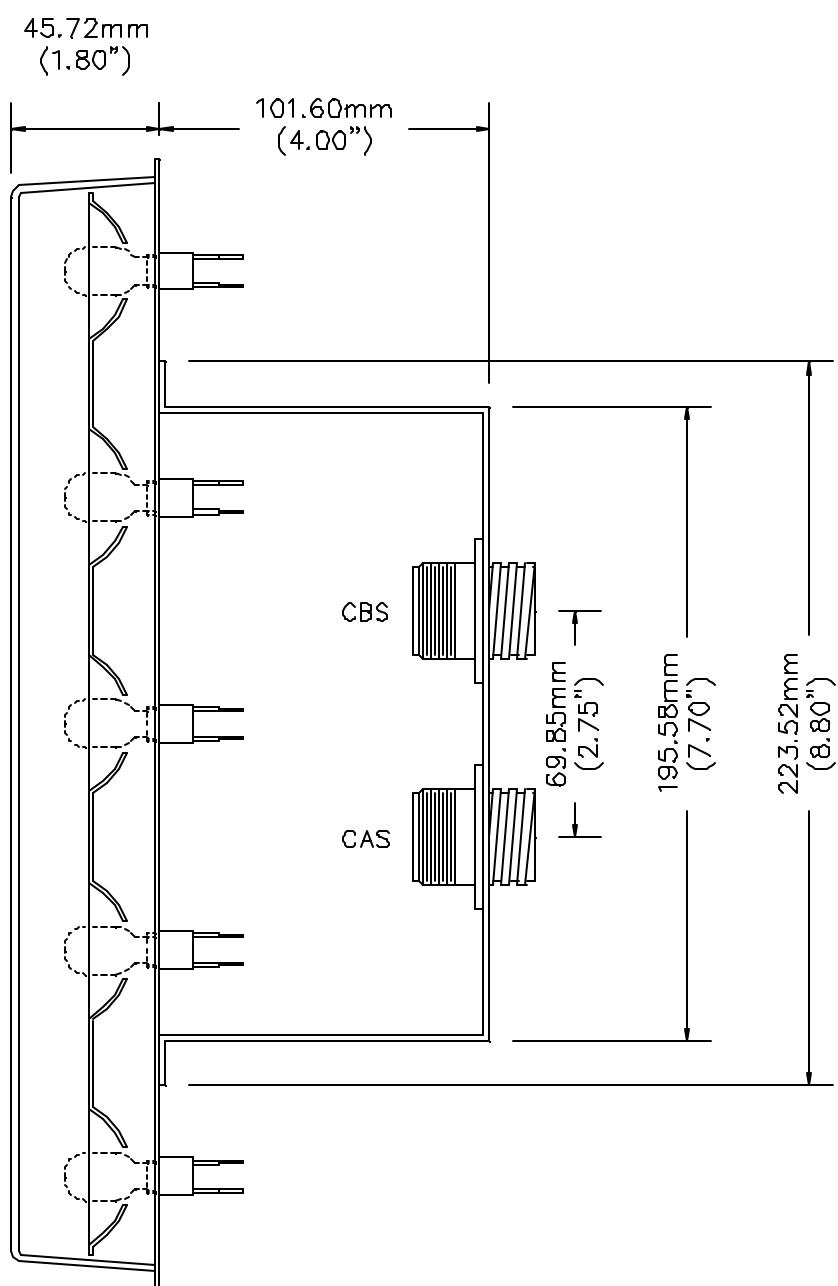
Side View of Model 500 PMM with Full Panel Molding.
